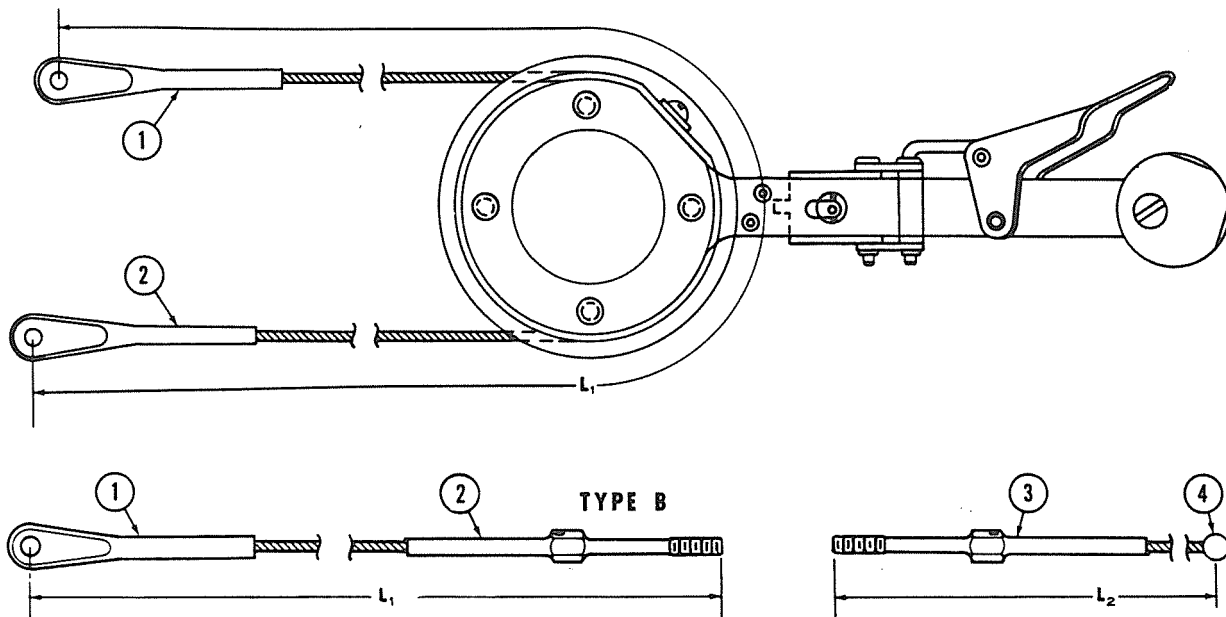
(Sheet 7 of 7 Sheets). Mixture Control System — Cable Charts and Cable Assemblies
